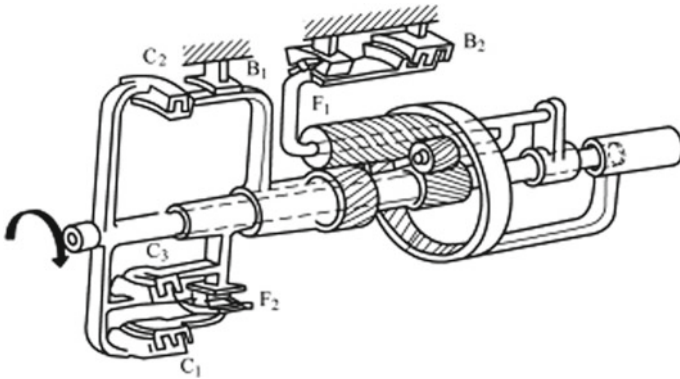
Improved Ravigneaux planetary gear train. B_1 —2 speed brake, B_2 —low and reverse gear brake, C_1 —forward clutch, C_2 —reverse and high gear clutch, C_3 —forward force clutch, F_1 —low-gear OWC, F_2 —forward OWC
